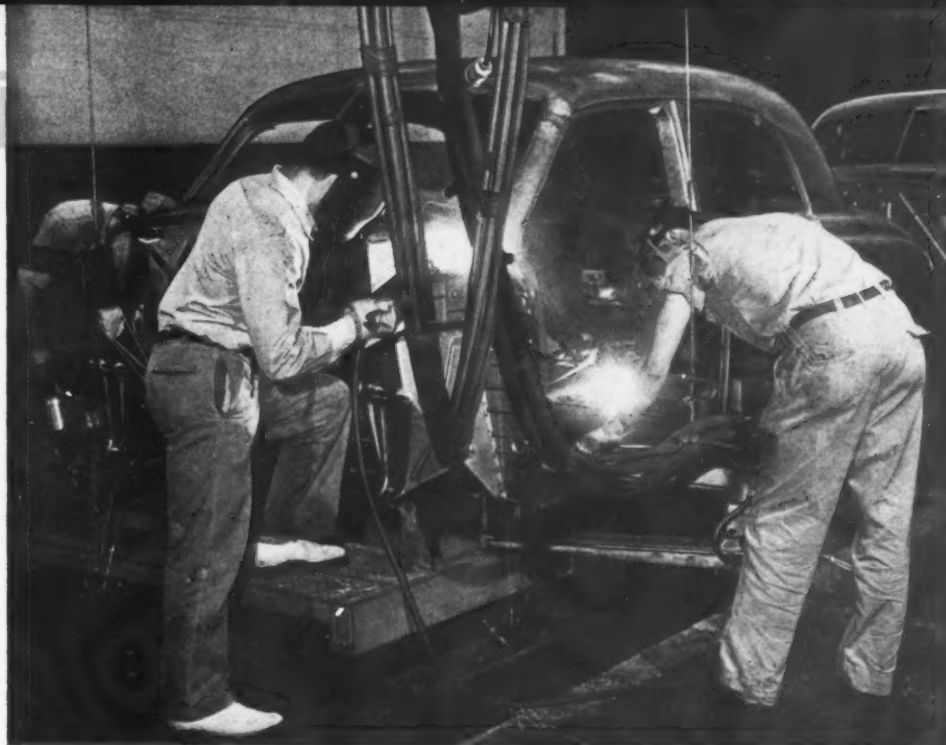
"Balloon" Fixture Used in Hand Gas-welding the Right and Left Rear Quarter-panels to the Top of the Automobile Body
